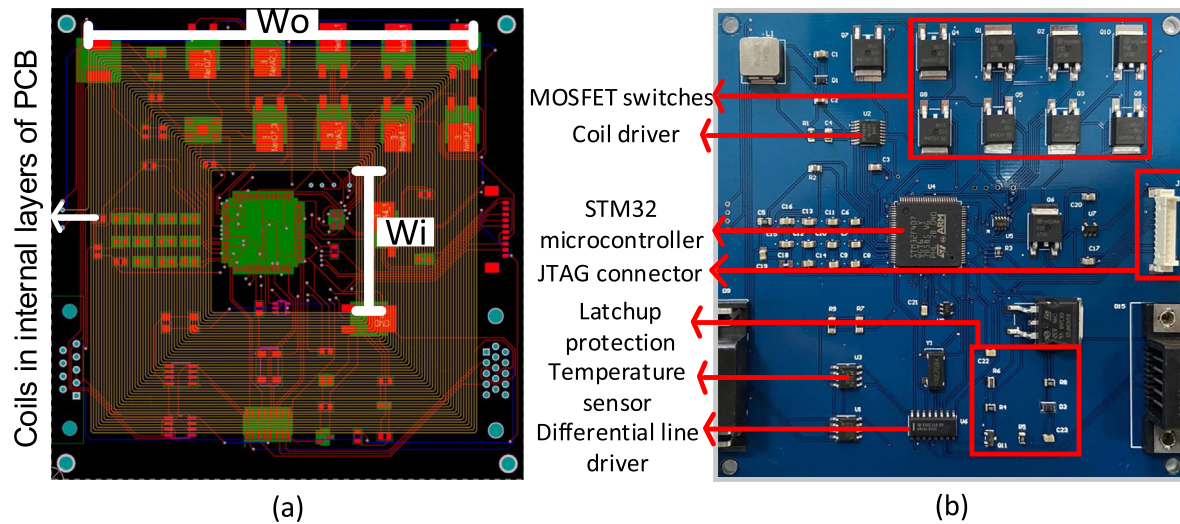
(a) Magnetorquer copper traces embedded inside the internal layers of PCB. Fig. 3 (b) Magnetorquer coil driver PCB prototype.
